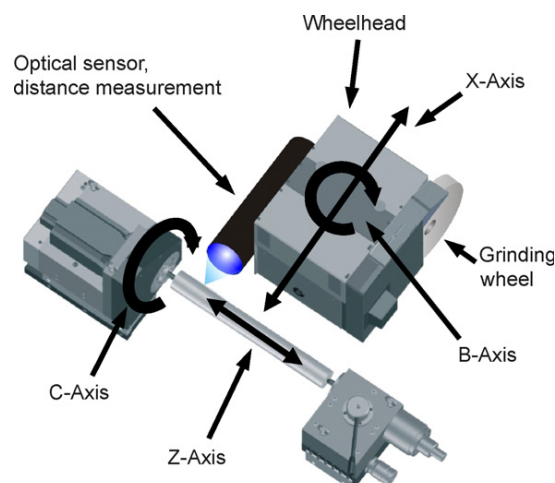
Arrangement of the optical sensor on the wheel head in the CGM [122].
